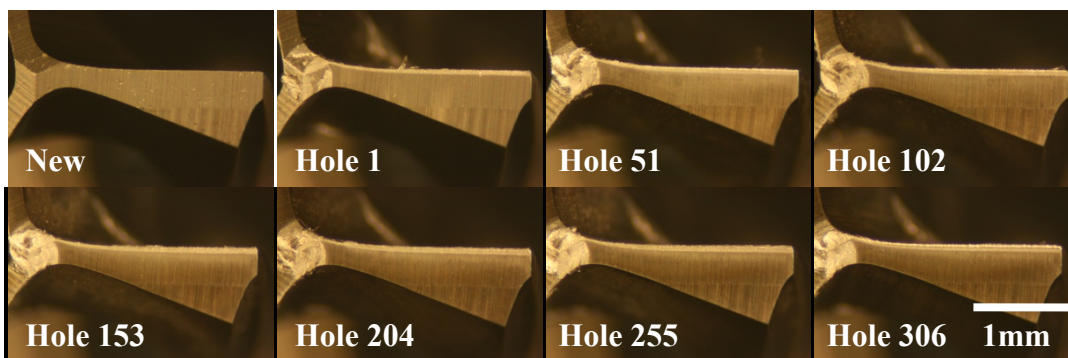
Tool wear micrographs of uncoated carbide drill under 3bar cutting fluid, 260m/min cutting speed (Test 2)
